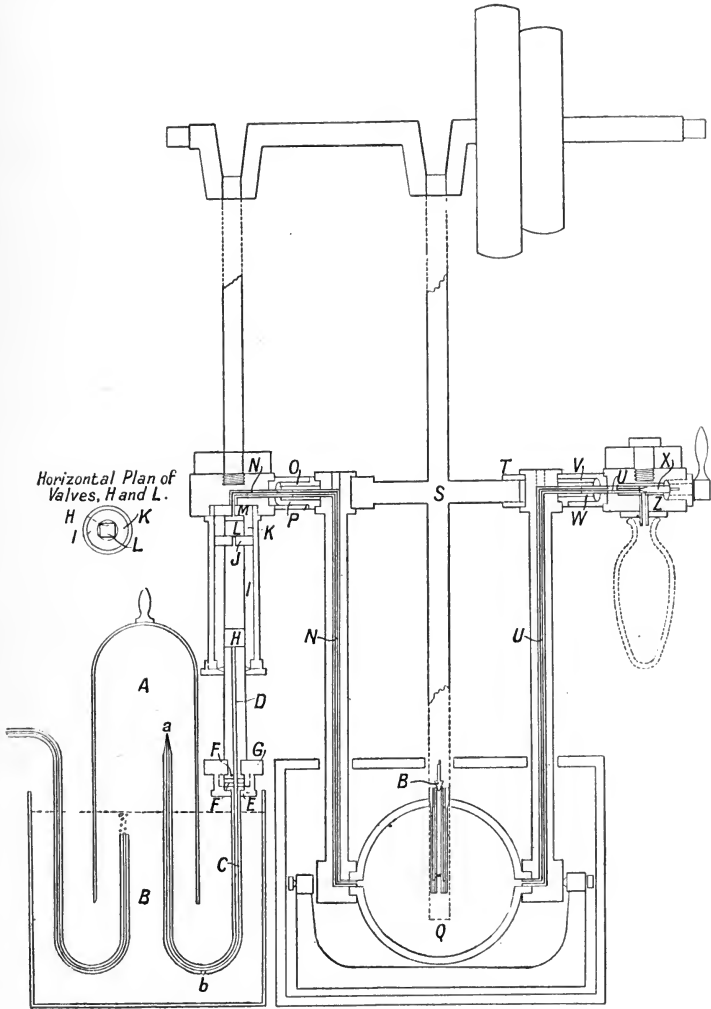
Hamilton's Continuous Process Machine. 1814.
